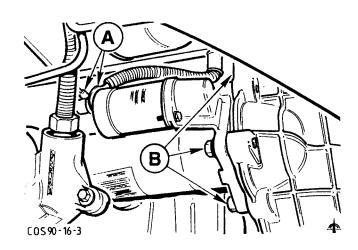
A - Starter motor wiring B - Starter motor retaining bolts
